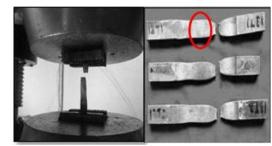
Tensile testing of weld specimen showing fractured location
